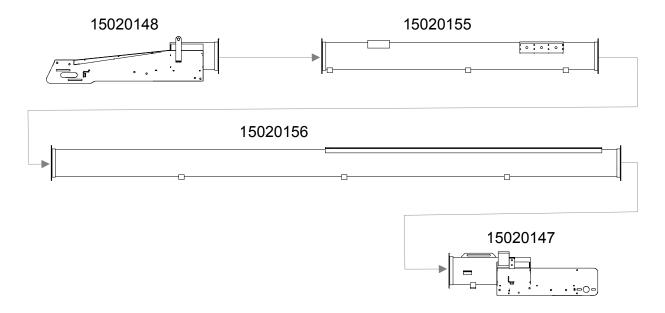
Conveyor Tube Layout for 1540 TD Model (Batco & Westfield)
